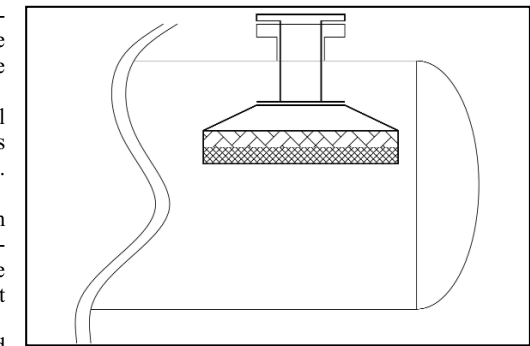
Weld-less introduction of housing and mist eliminator into horizontal vessel, supported with flanged spool piece.
